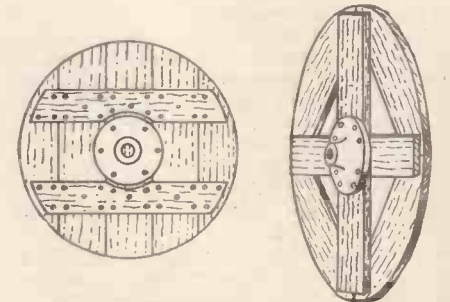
(Left) Work built up from several pieces of wood before turning.
